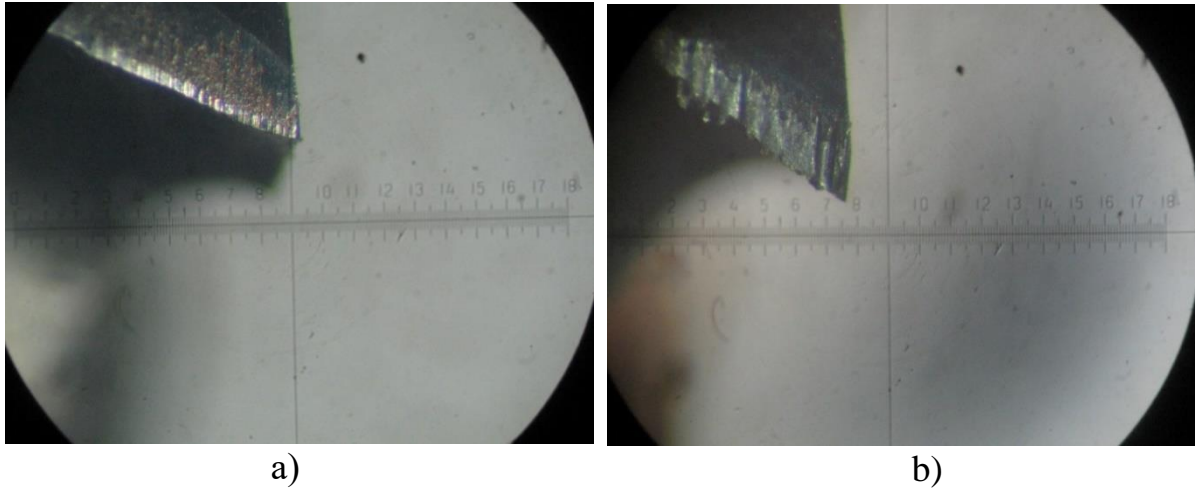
Measurement of cutting tool at tool microscope MBC-9: a) End mill №1 after the third cut; b) End mill №4 after the third cut
